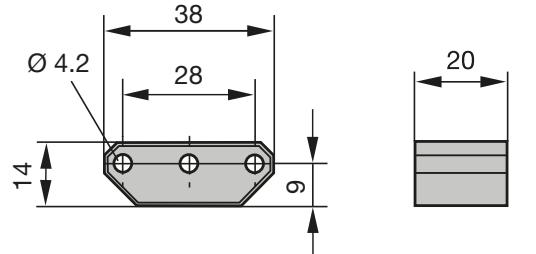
Installation dimensions of BTL5-P-3800-2 magnet
